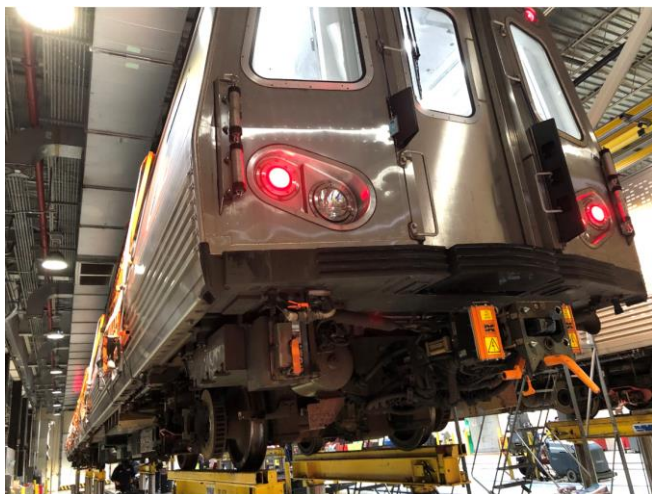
The truck center pin liner on 7K series railcars is pulling out from its original location
